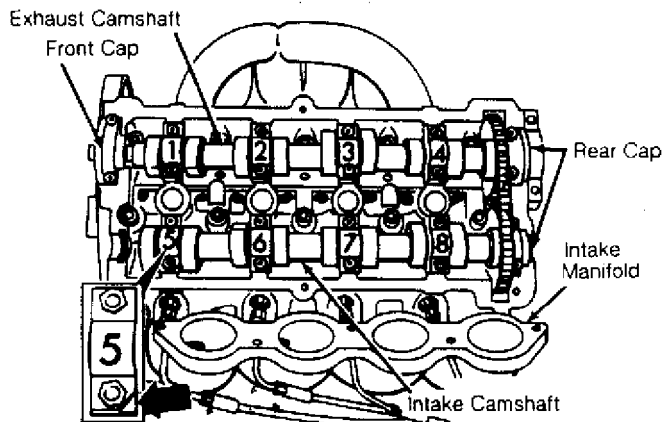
Identifying Camshaft Bearing Caps (2.0L)
